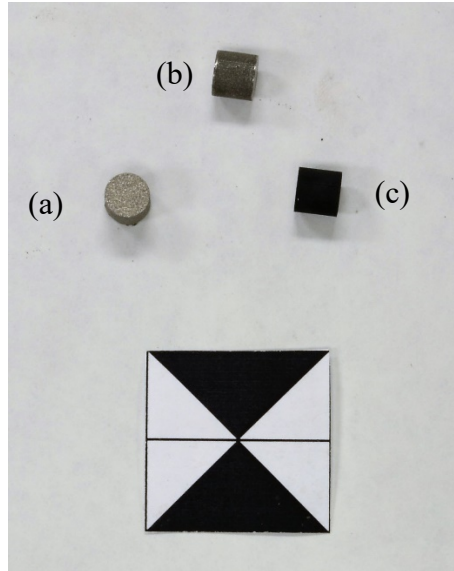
Additively Manufactured IN625 Compression Test Samples: (a) as printed, note rough surface finish, (b) machined ends, not annealed, (c) machined ends and annealed
